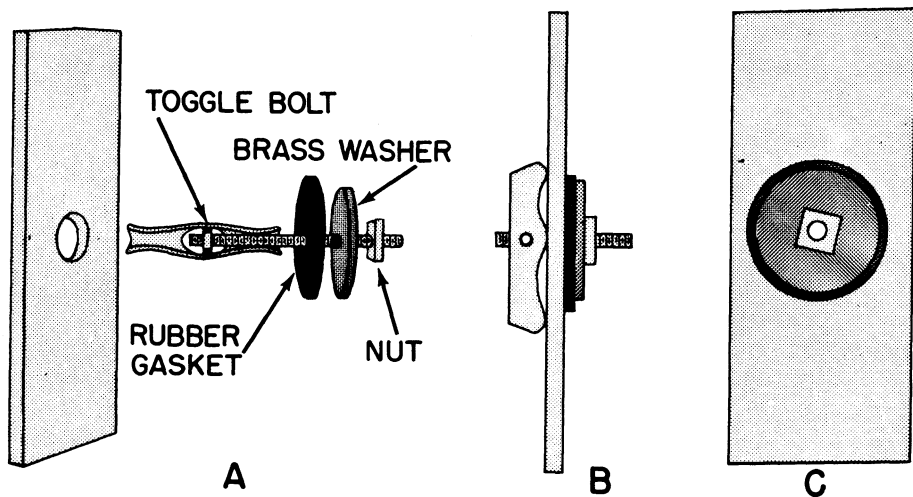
Closing a hole in a tank: *A*, The link of the toggle bolt is passed through the hole in the tank (hole is enlarged if necessary). *B*, Side view of tank edge (nut is drawn up tightly to compress washer and gasket against tank). *C*, Outside view of completed repair.
